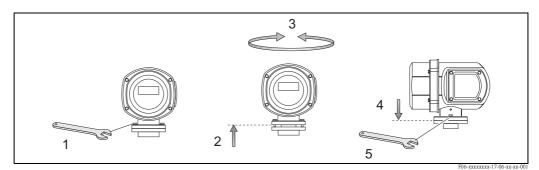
Turning the transmitter housing (stainless steel field housing)
